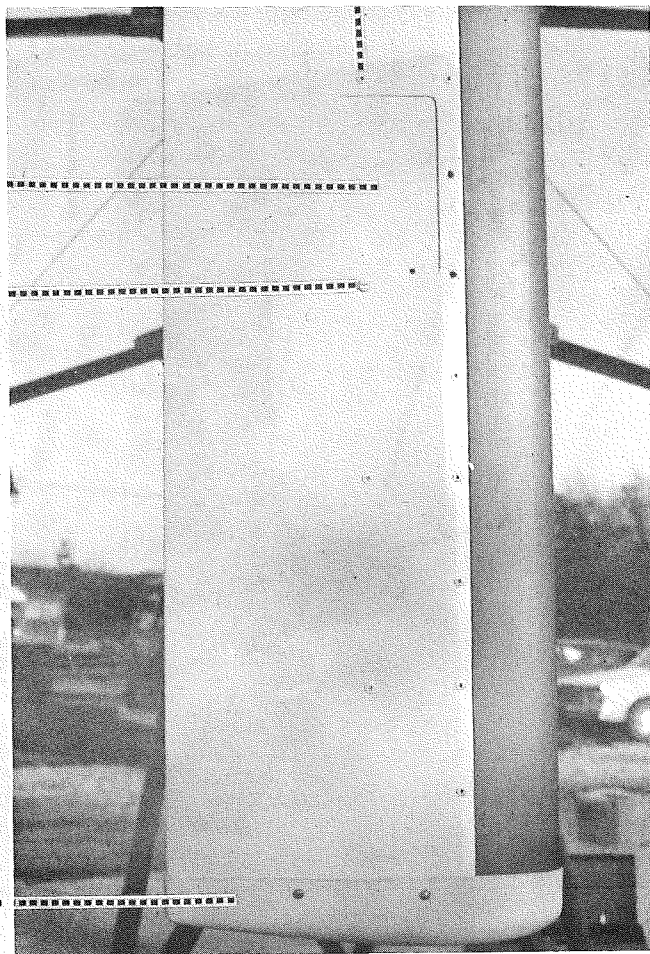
Lower End of Blade Showing Access Cover in Place and End Cap.
